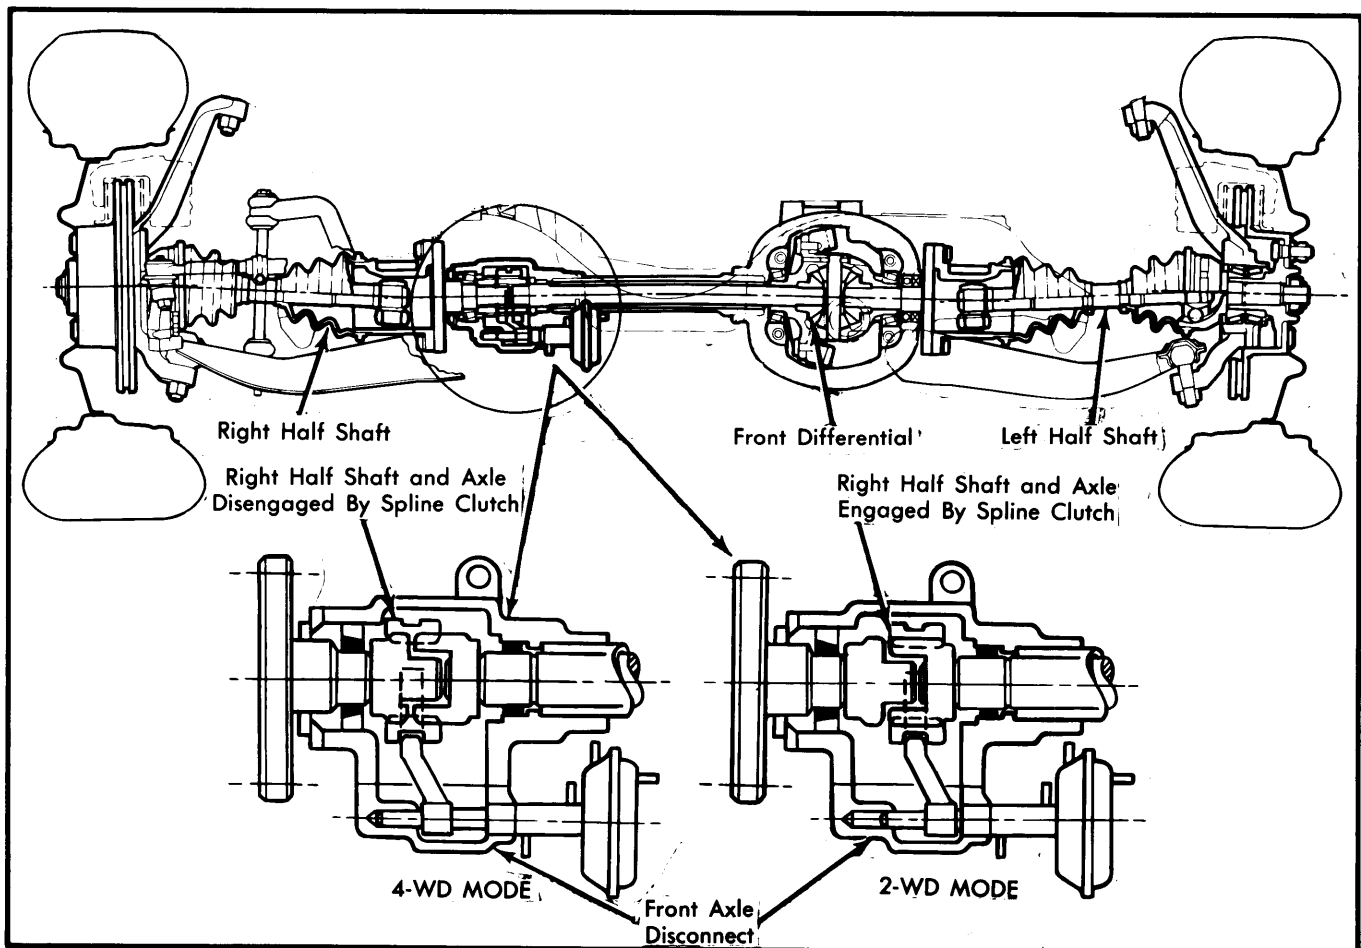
Exploded View of Eagle Select Drive System with Exploded View of Front Axle Disconnect
